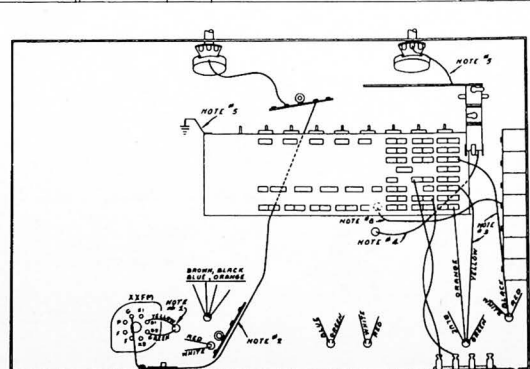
CRITICAL WIRING LOCATIONS, F. M. ALIGNING
